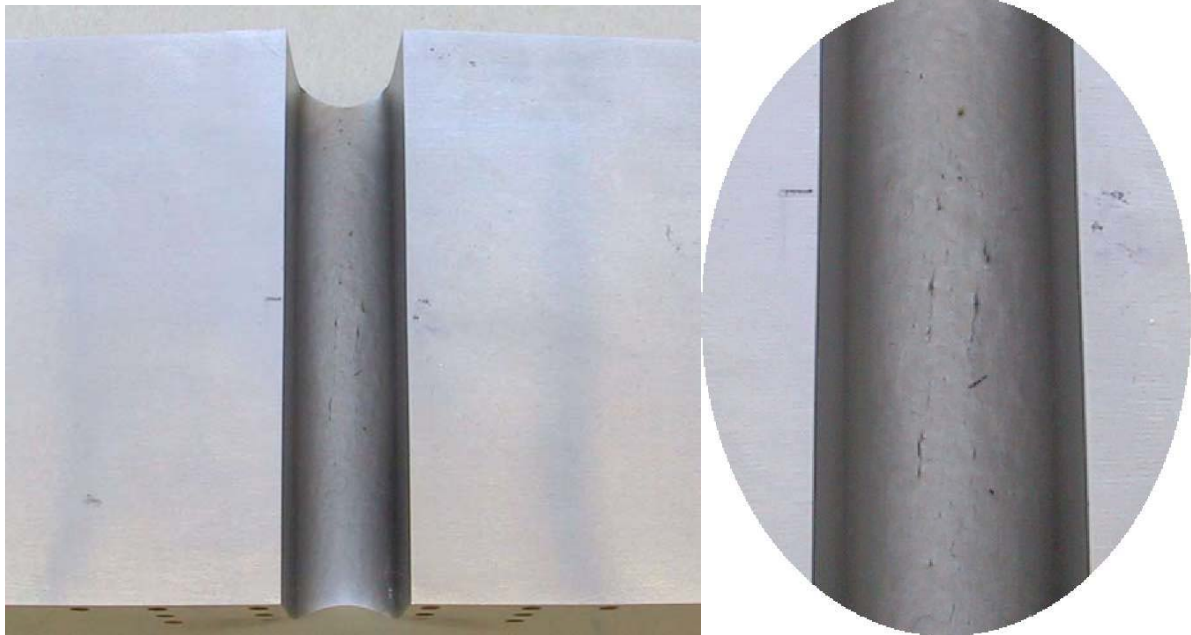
Notch of a big bending specimen with initiating cracks
